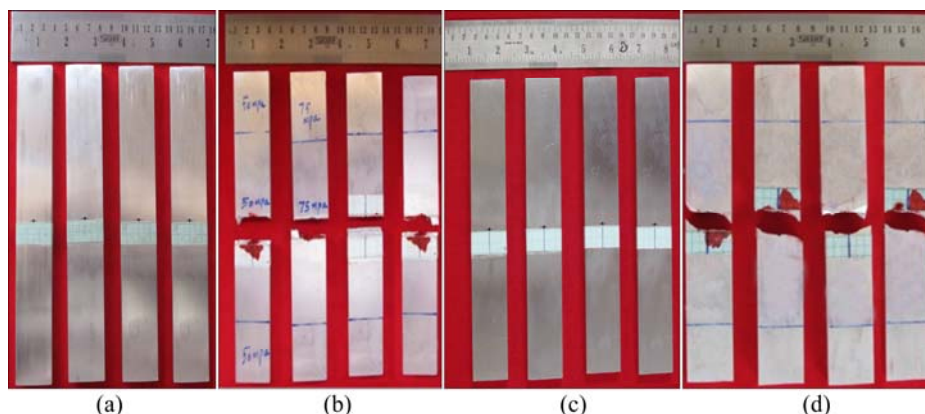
Photographs of CCT specimen: (a) Parent metal before testing; (b) Parent metal after testing; (c) Weld joint before testing; (d) Weld joint after testing
